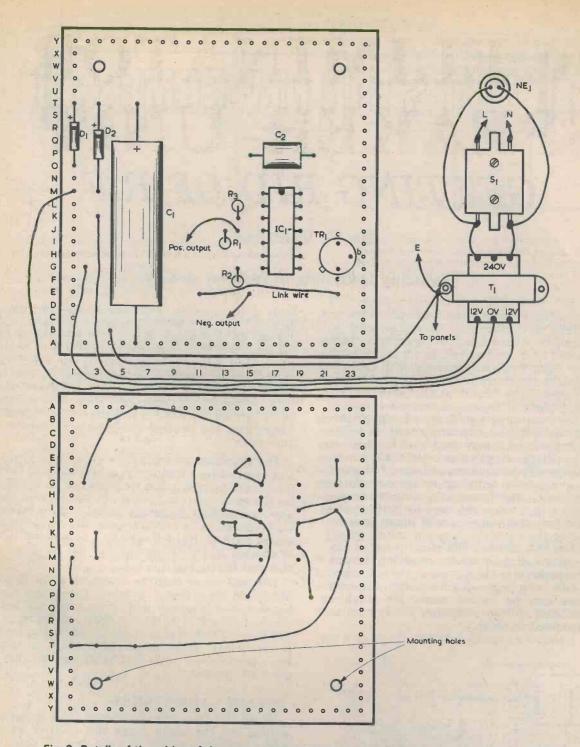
Details of the wiring of the power supply section of the unit. The speaker simply connects to a jack plug which is inserted in the receiver output socket
